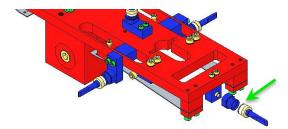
RH end of Main Section; 9 of 9 Magnet Assys
